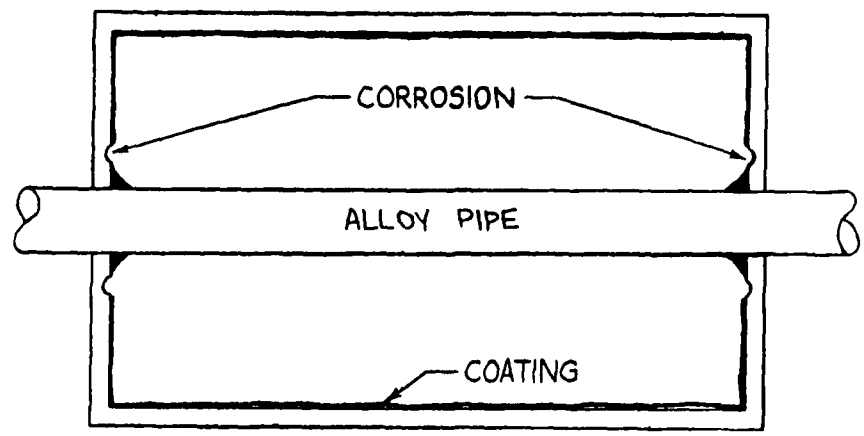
Deep corrosion in hull adjacent to nickel copper alloy to steel hull weld (seawater)
